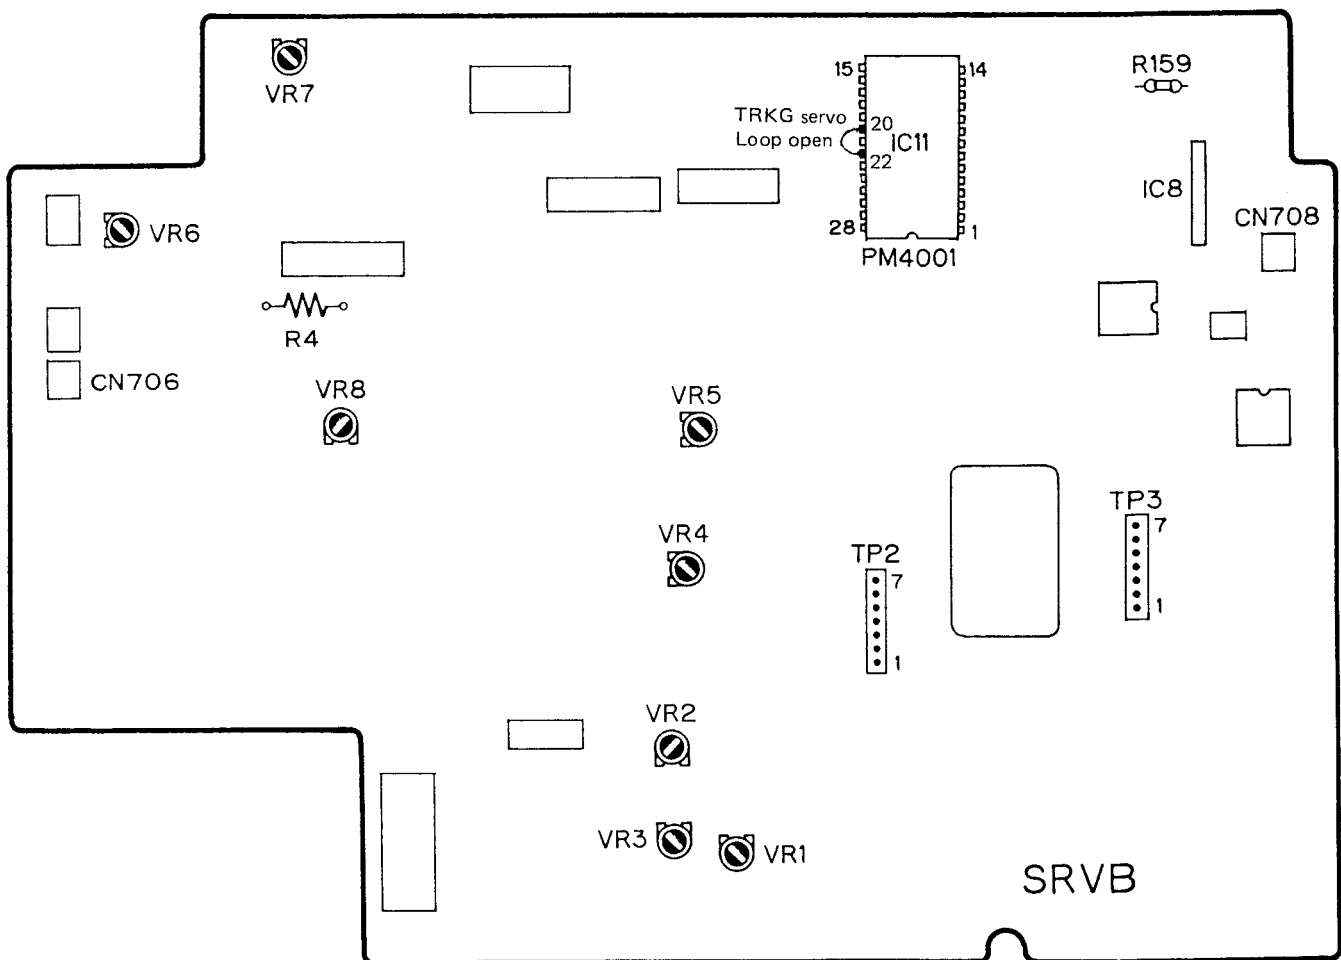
Adjustment sections on SRVB Assembly
